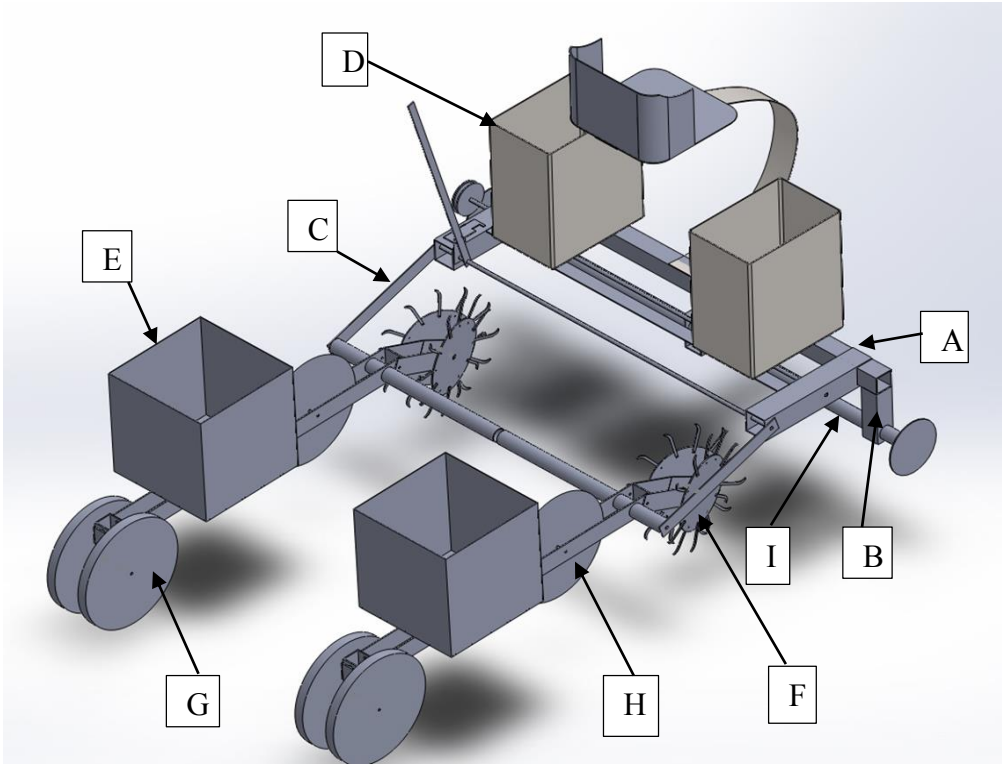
3-D Solidworks model. A) Horizontal frame B) Leg Frame C) Short Arm D) Seed Hopper E) Weight Box F) Residue manager G) Press Wheel H) Furrow opener I) Axle
